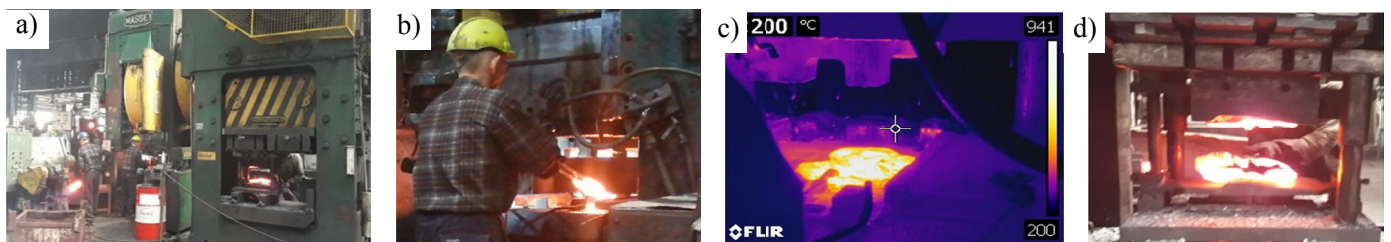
Production line to produce a lever type element: a) view of the forging work centre, b) the process of die forging, c) a thermogram of die forging, d) trimming of a hot forging
